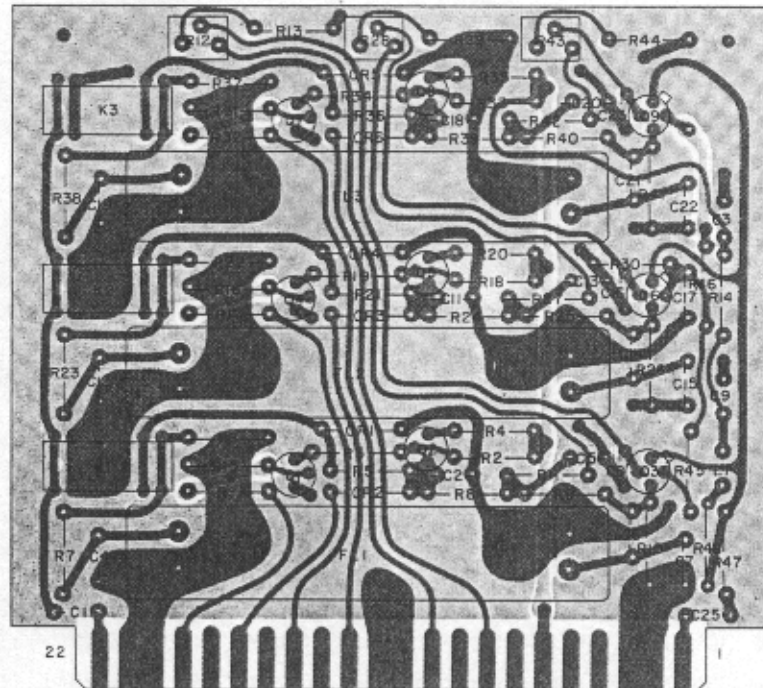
Type 72399-X IF Filter Assembly (A4, A6), Location of Components
